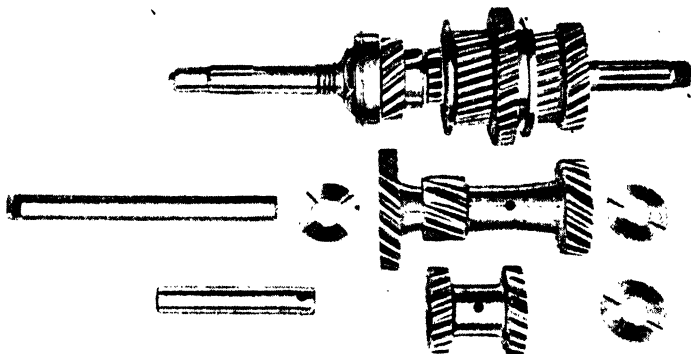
GEARS AND SHAFTS OF THE VAUXHALL THREE-SPEED GEARBOX (10 H.P. AND 12 H.P. MODELS)
